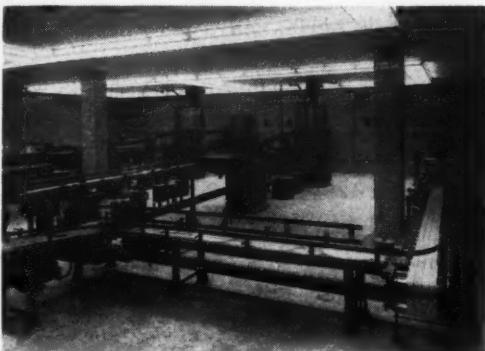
Cylindrical packaging units are shown in rear in this view of first floor
